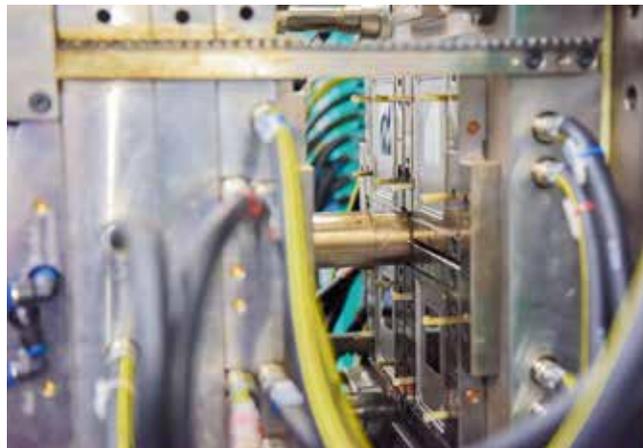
View inside the stack mold. The rack and the melt guide tube are clearly visible (© Priamus)
